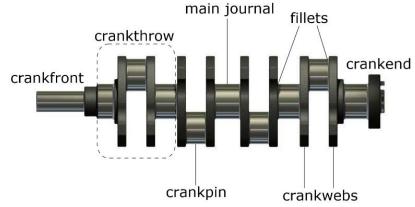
Schematic drawing of a four-cylinder crankshaft
